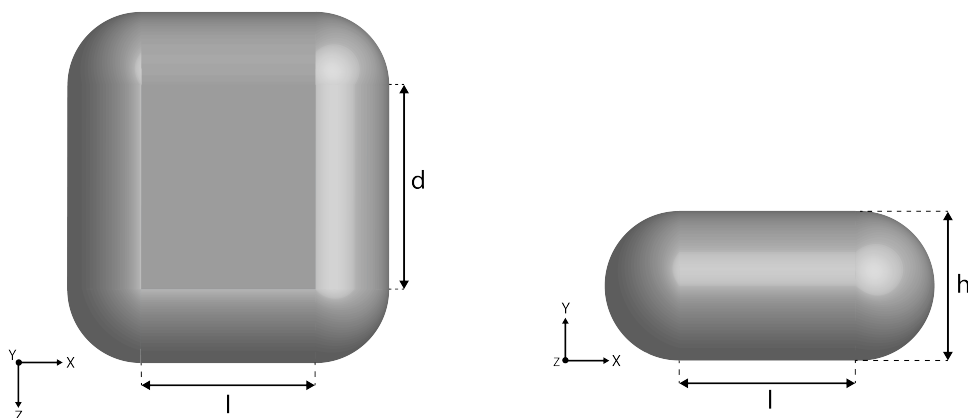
Schematic overviews of 3D hinge design. (a) The top view of the 3D hinge design. (b) The side view of the 3D hinge design. The indicated dimension are corresponding to the detailed hinge design.
